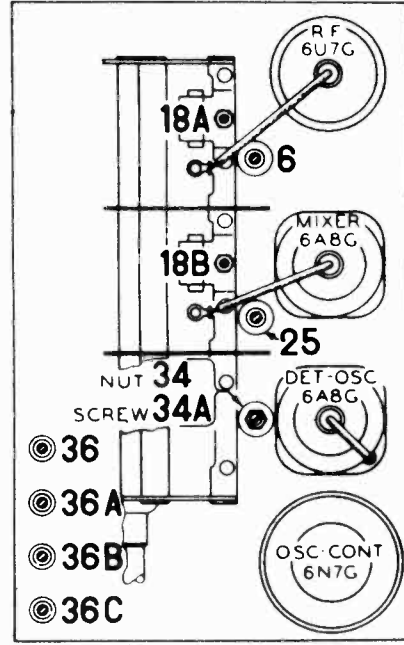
Top View of R. F. Unit Showing Compensator Locations
